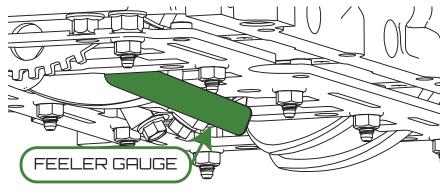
Inspecting Clearance with a Feeler Gauge
